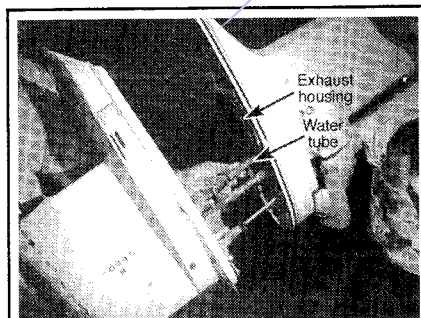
Install the gearcase, carefully aligning the driveshaft, water tube and shifter rod
